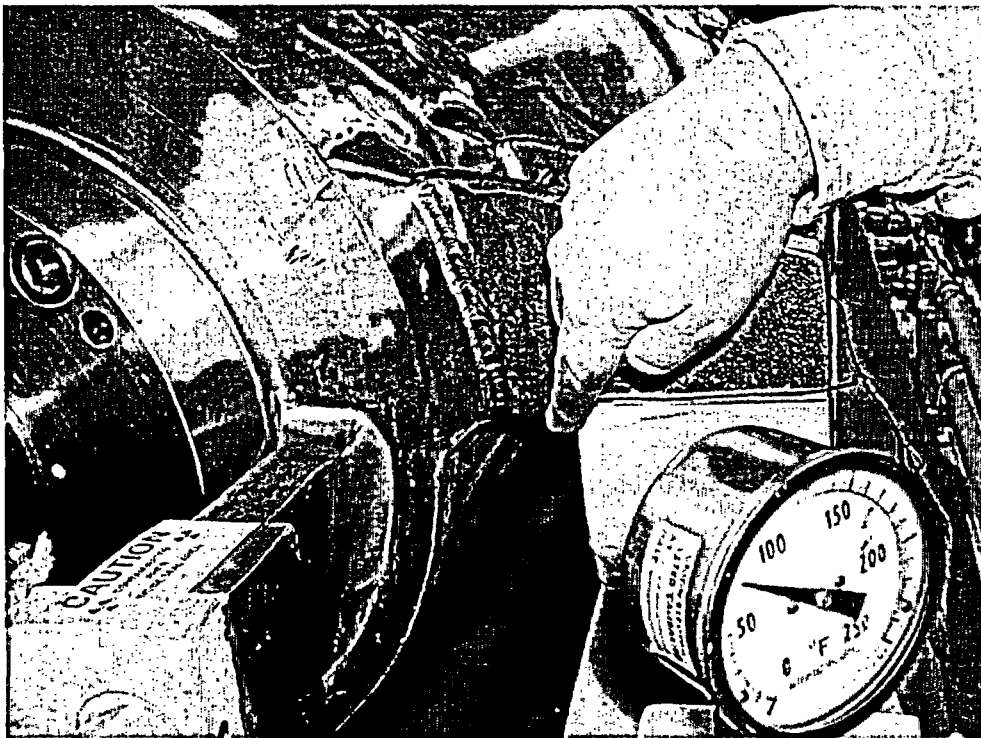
, 2-PBG05A-SUP-3 showing wider clearance between mount and pump
